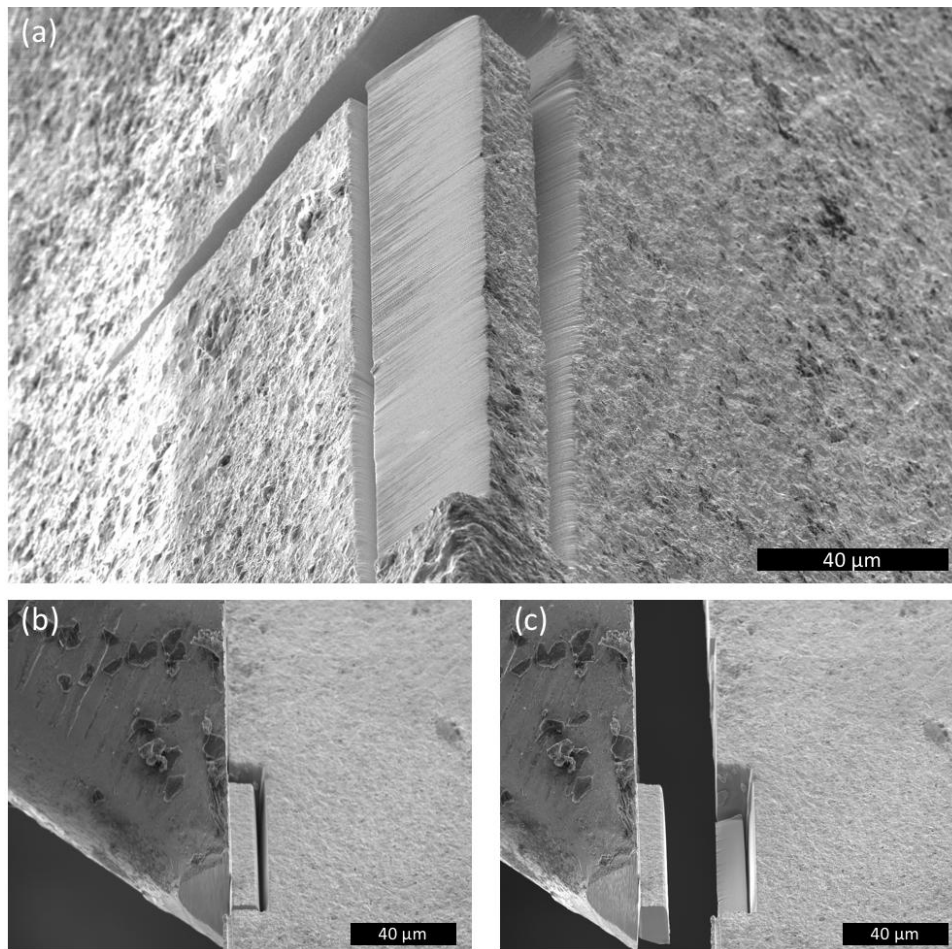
(a) Block of a WC-Co specimen milled with an ion beam. (b) Engagement of the block to the tool holder for welding by Pt deposition. (c) Extraction of the tool for further sharpening operations.
